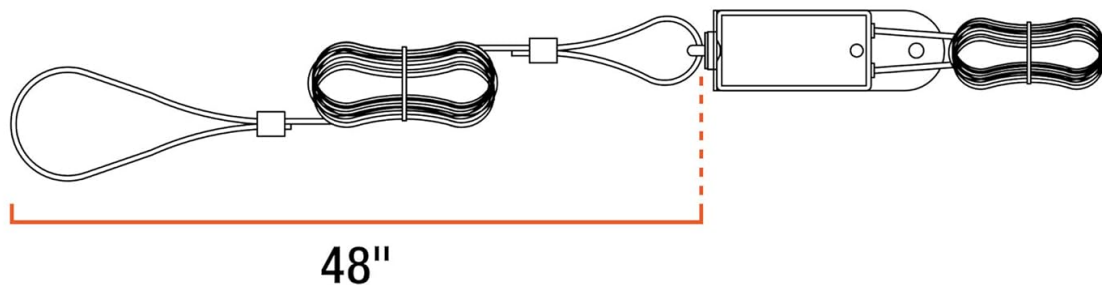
Approximate dimensions of the breakaway switch and cable (48 inches).
